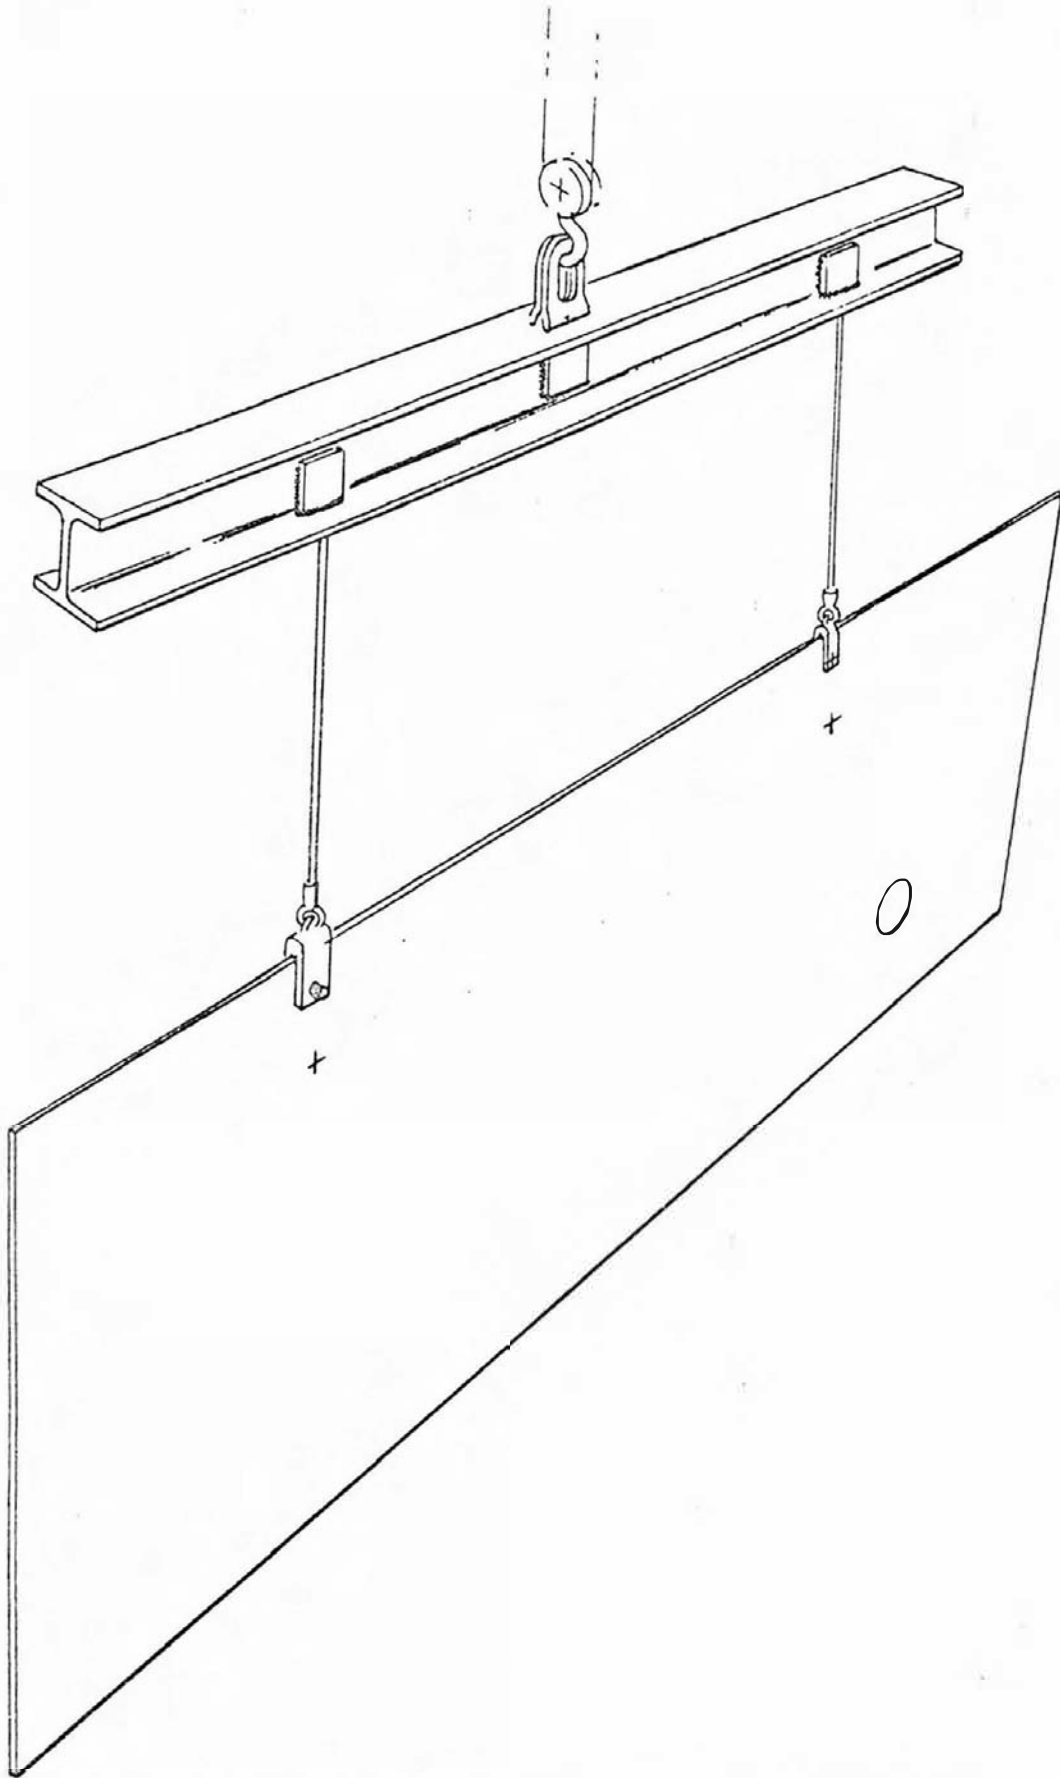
Center Engine Support Web Assembly Hoisting Tool
